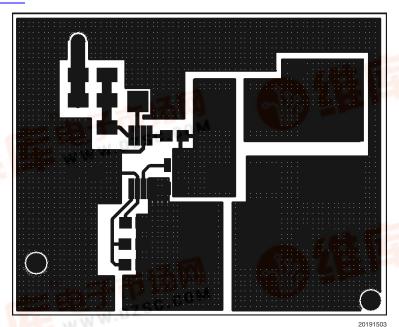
LM3489 Demonstration Board PCB Top Layer Layout
